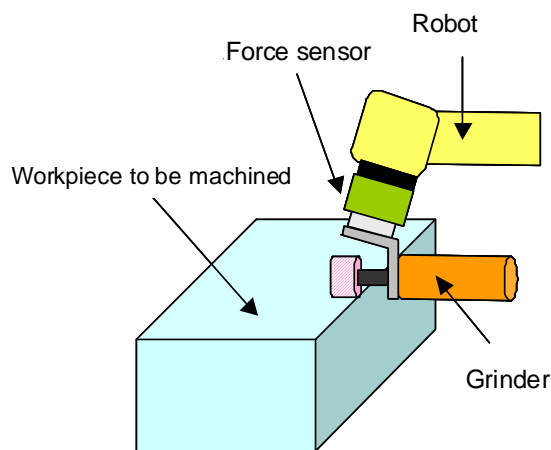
(a) Example of Surface Grinding (with Tool Held by Robot)
